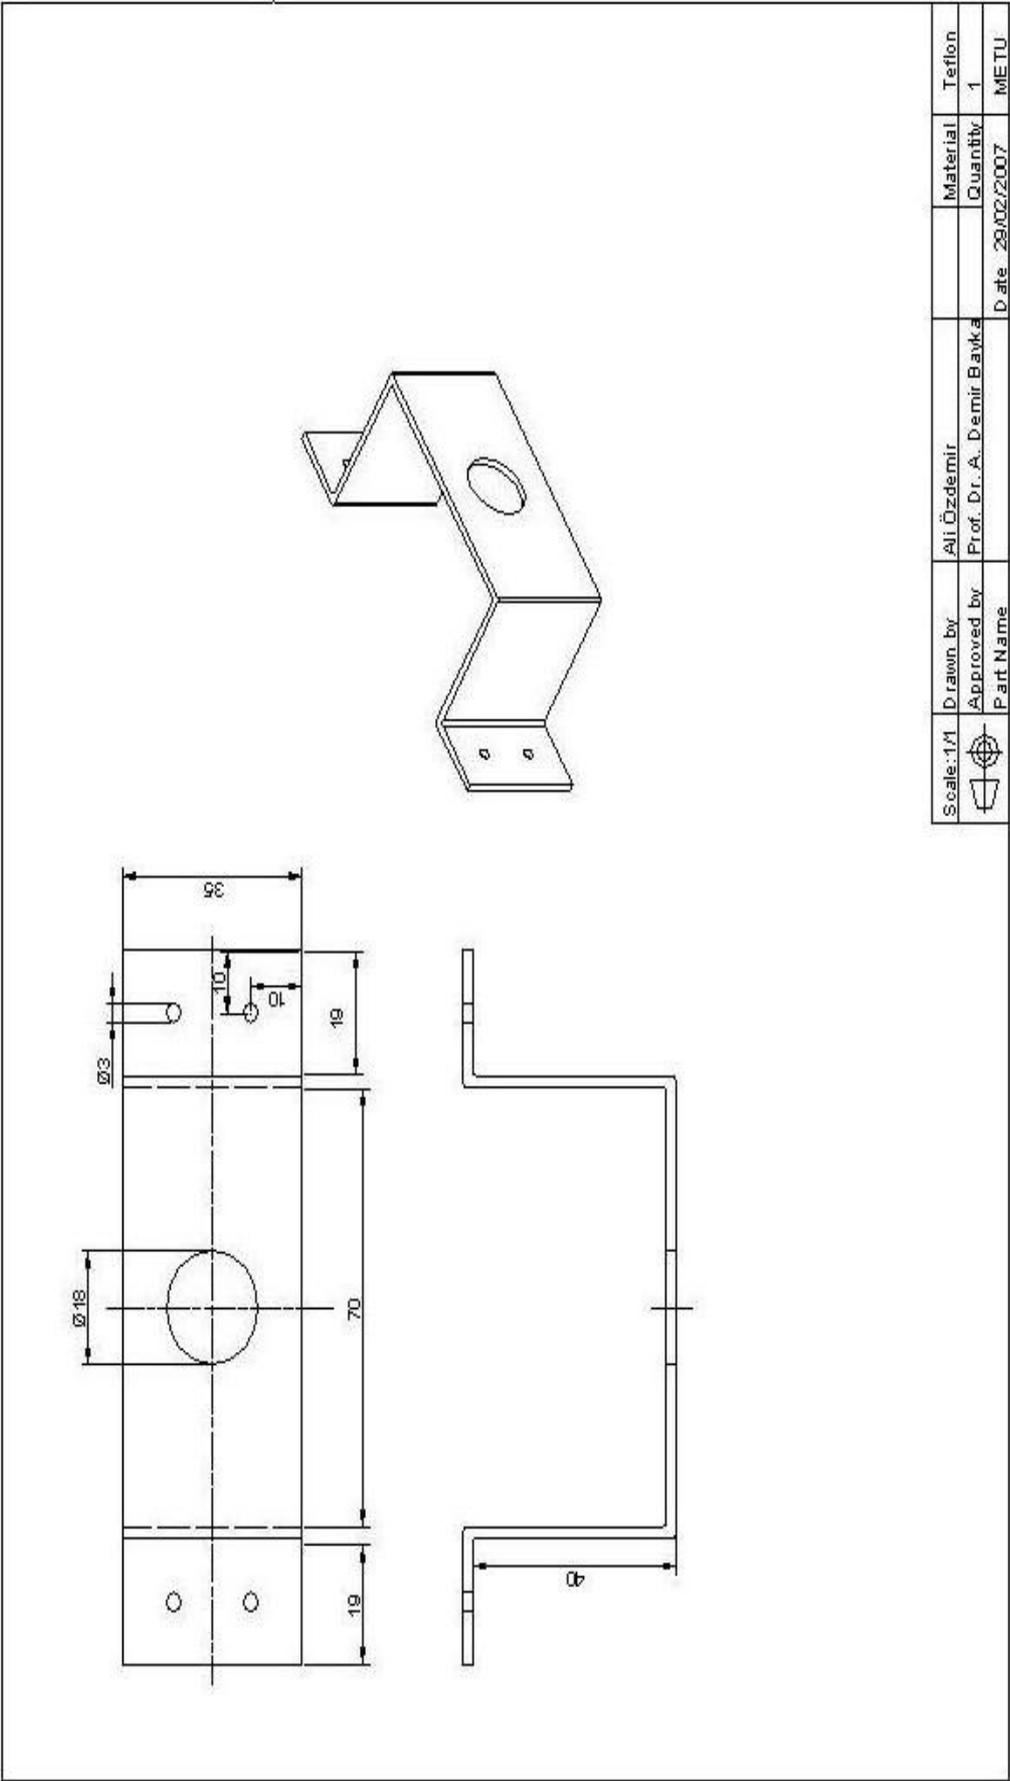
Technical Drawing of Capacitive Sensor Holder
